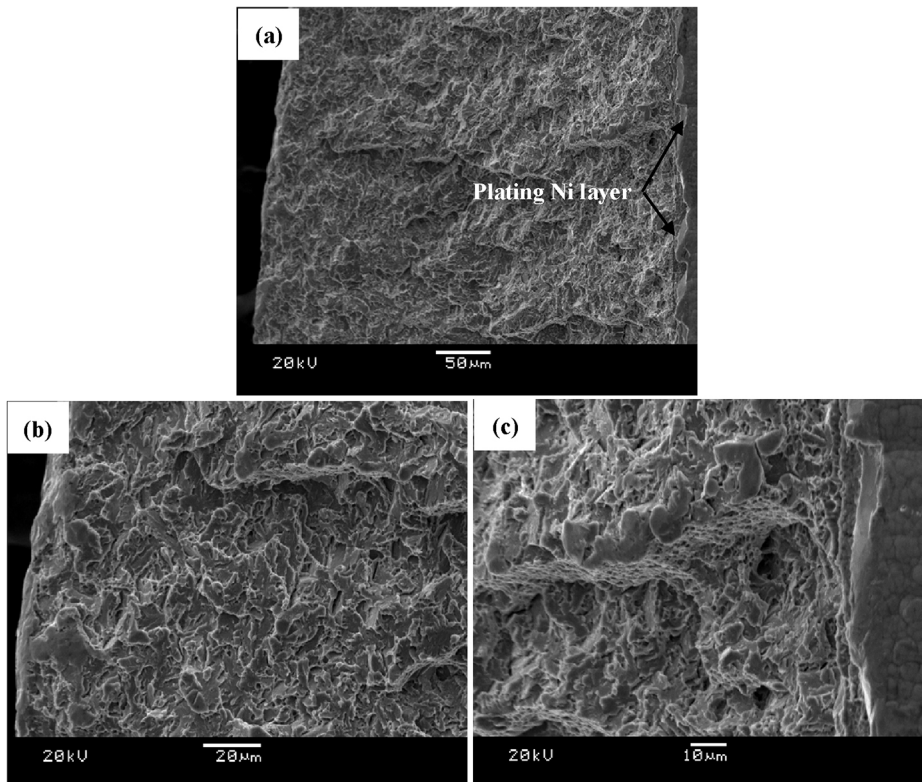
SEM images of fracture surface of the component. (a) Fracture surface, outer (b) and inner (c) zones at the position of 90° angle
